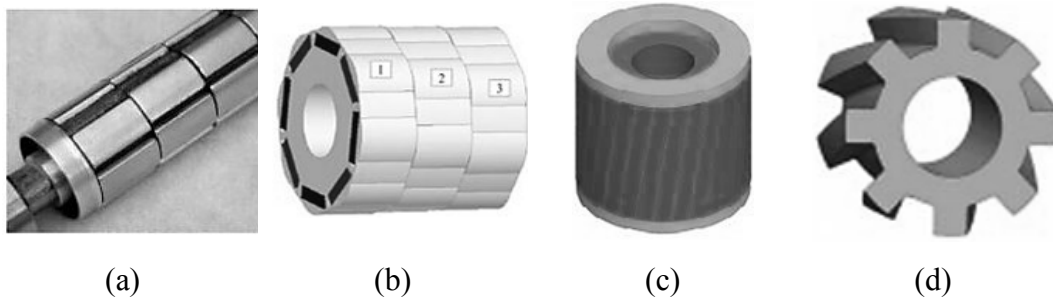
(a) Stepwise skew of the rotor for a surface PM machine. (b) The stepwise skew of the rotor for an interior PM machine. (c) Skewed squirrel cage rotor of an induction machine. (d) The skewed rotor of a synchronous reluctance machine [15].
